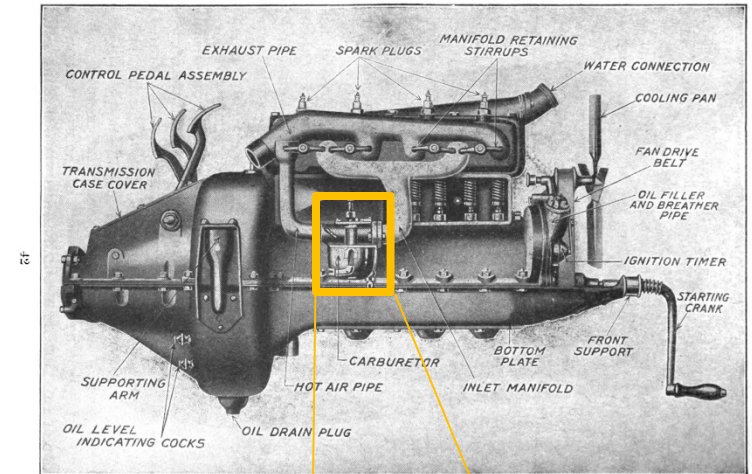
Valve Side of the Ford Model T Unit Power Plant Showing Manifolds, Carburetor and Interior of One of the Valve Spring Chambers.
